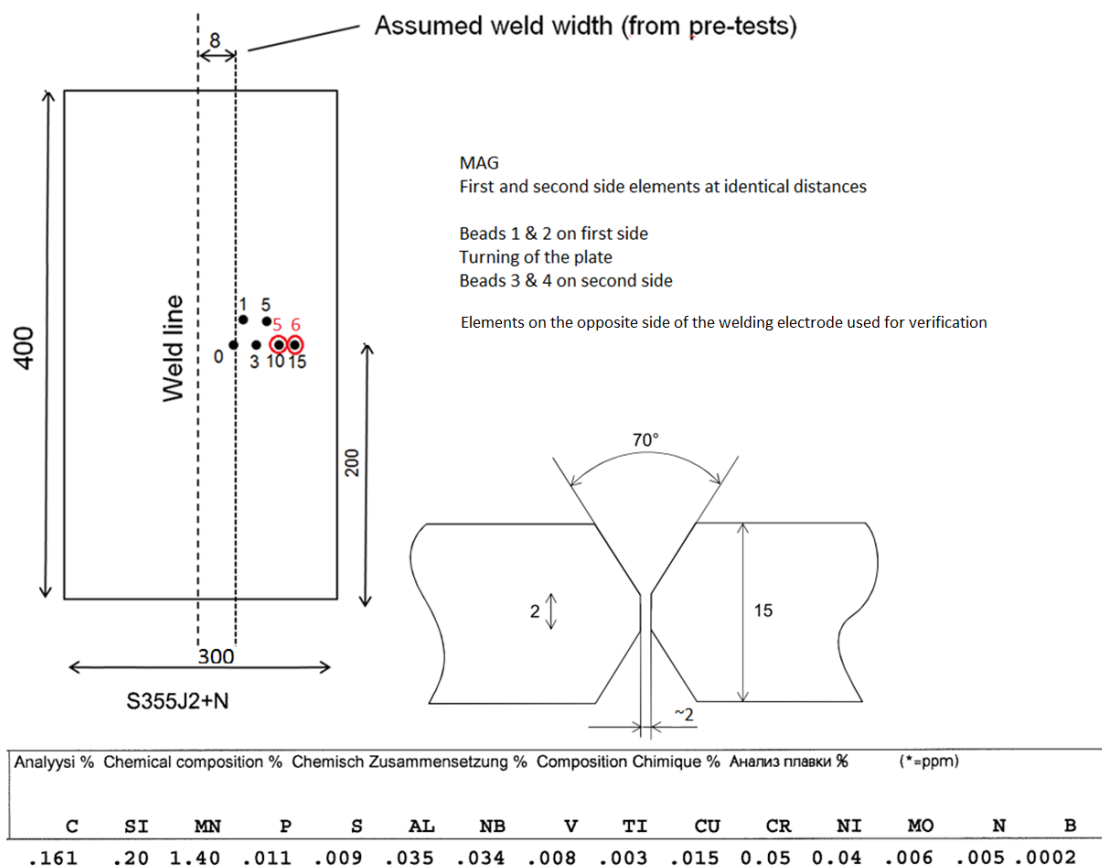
Butt-weld-plate and location of thermocouples. Thermocouple IDs are shown in red numbers.
